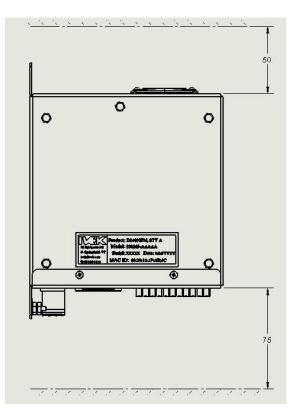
Minimum Installation Requirements (Dimensions are in mm)
